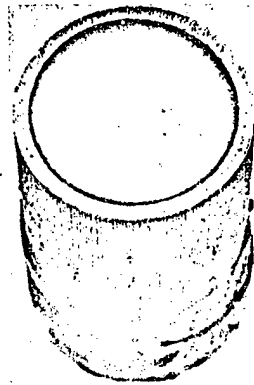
Explosively welded fiber reinforced hollow cylinder (fiber: tungsten 0.1 mm; matrix: zirconium 0.1 mm; fiber volume fraction 24%).
